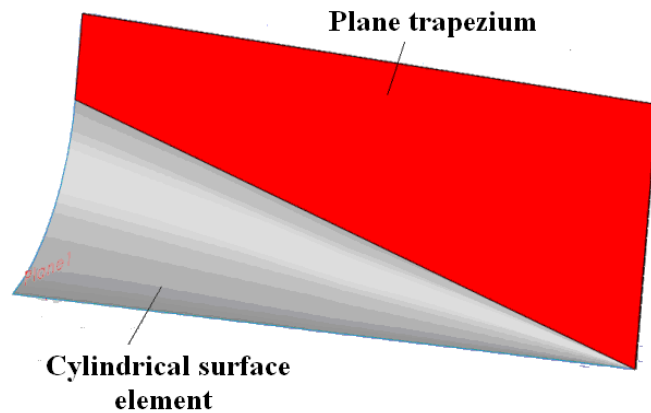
Vane of rectifying apparatus of air jet generator
